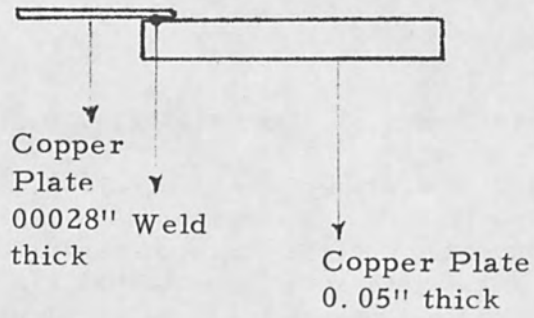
Schematic illustration of a cross section of EB weld.
